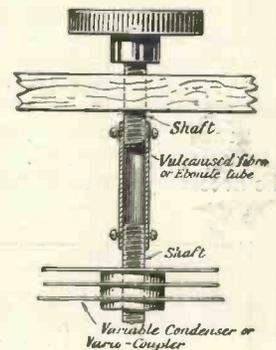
The remote-control arrangement in position on a condenser spindle.
